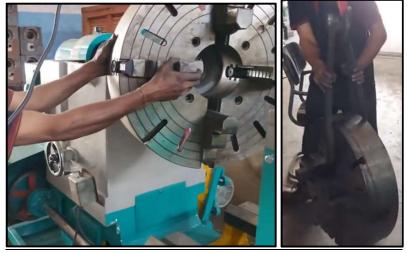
Unloading Chuck from Lathe Traditionally (2)
